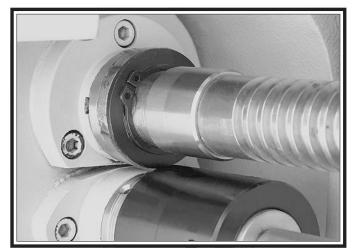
Retaining ring positioned with ears in front of pin access groove.
